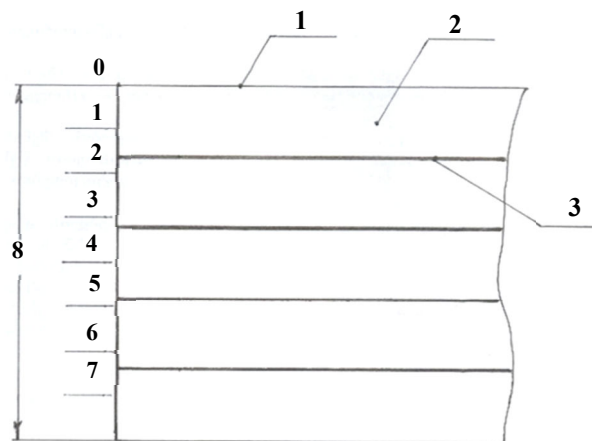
Package diagram printed circuit boards of 5 plates.
